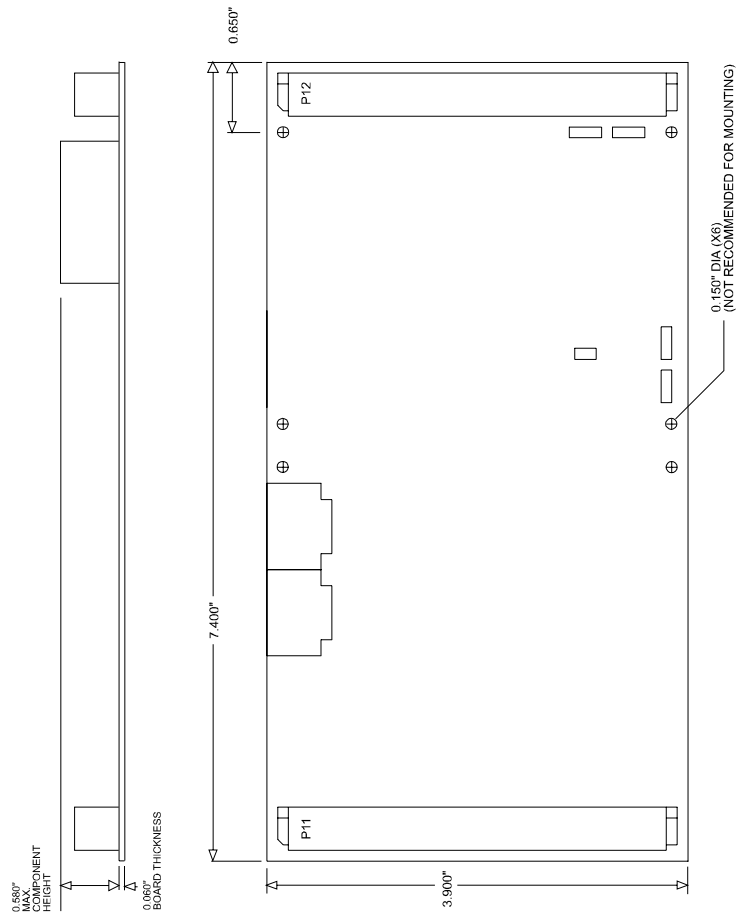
ACR8000 Daughterboard Mechanical Dimensions
